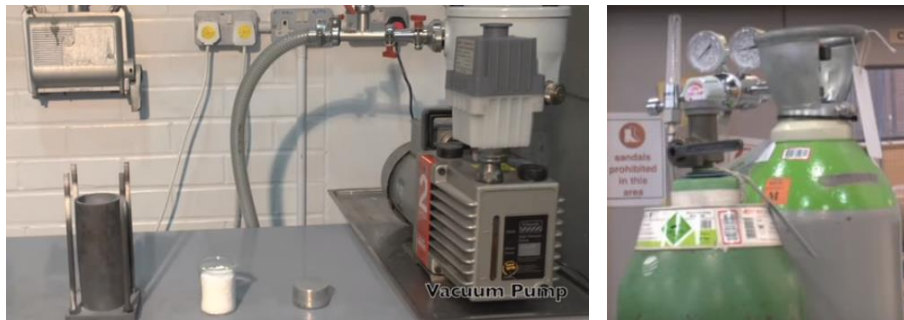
View of mould, table salt, aluminium tablet and argon pressure vessel, LUNA [15]
